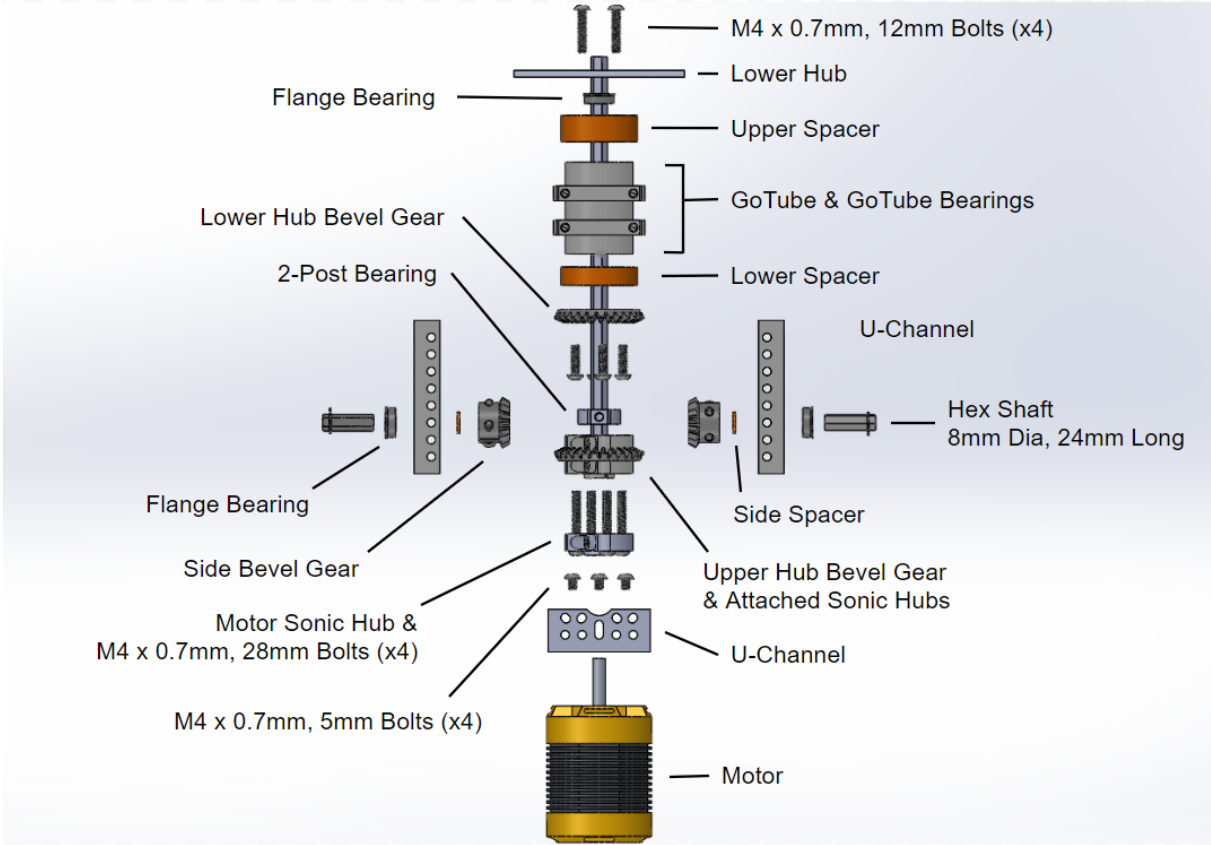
Bevel gear design for contra-rotation (exploded, side view).
